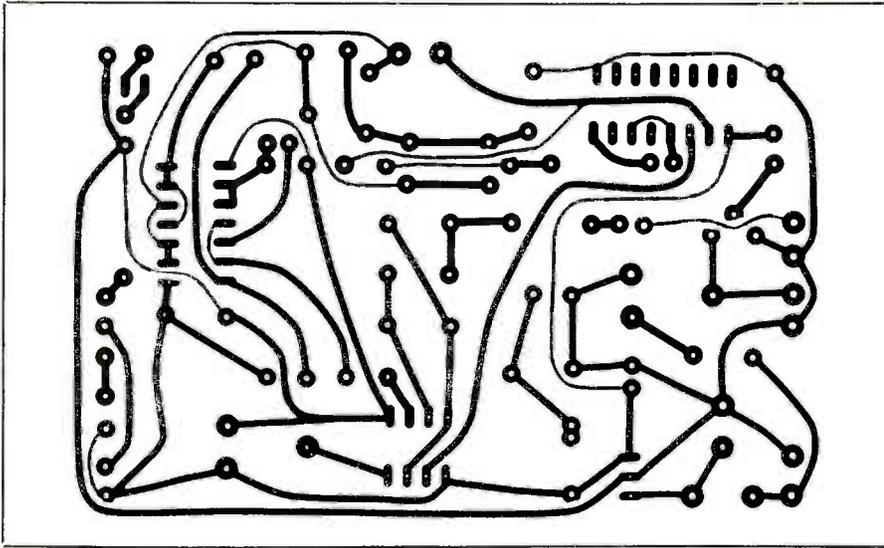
Actual-size etching-and-drilling guide for project printed-circuit board.
